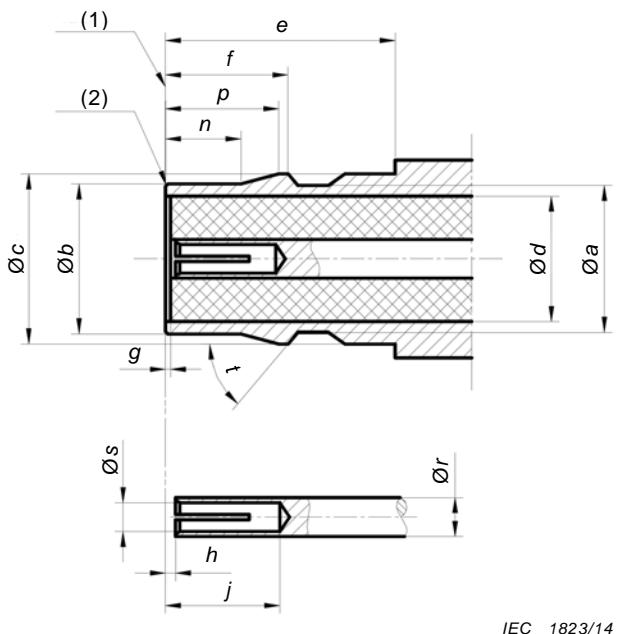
Connector with socket-centre contact (for dimensions and key, see Table 2)
